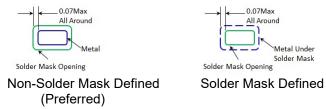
Solder Mask Pattern (Dimensions are in mm)
